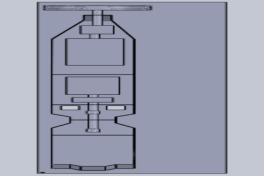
, Axle, Impeller and machine assembly on the model (top view)
